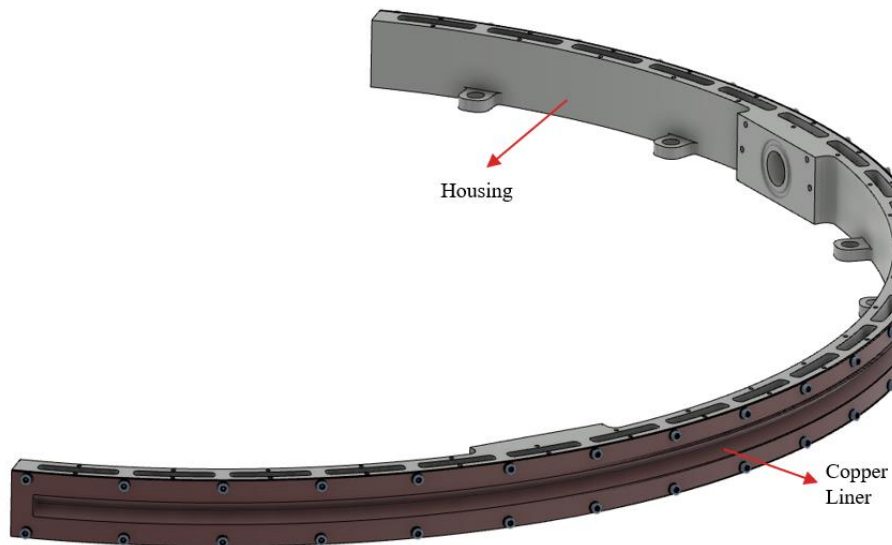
CLSC (On Tube of Inner Radius) Isometric View
